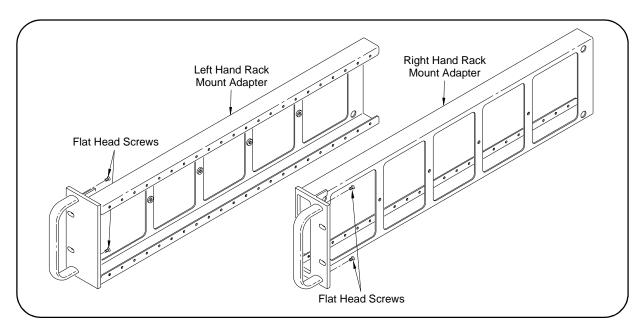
Attaching Handles to the Rack Mount Adapters
